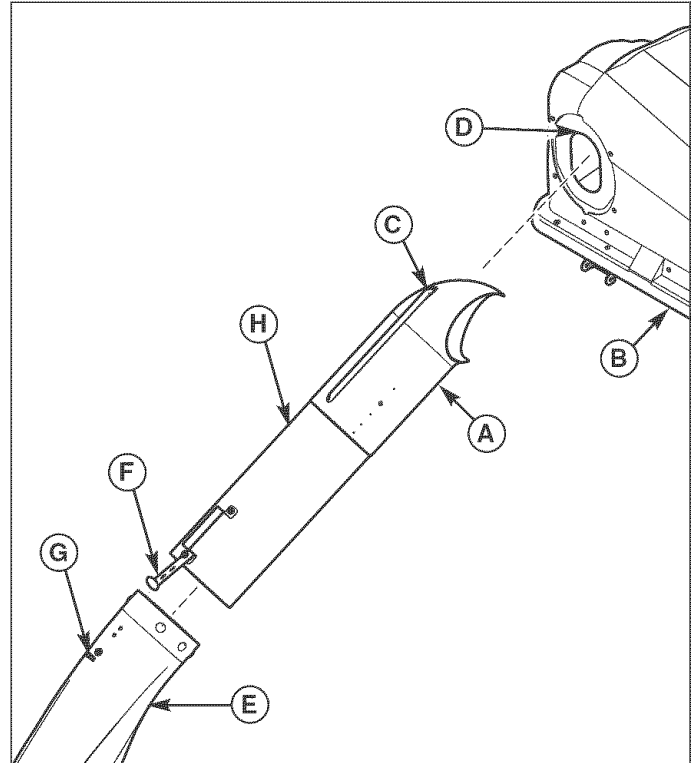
Connecting Tube Assembly to Lower Chute and Cover
